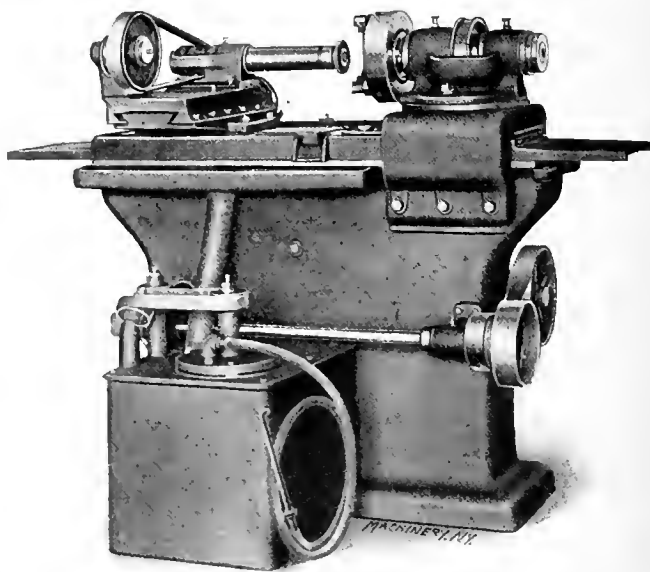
Rear View of Machine showing Drive of Wheel Spindle and Provision for Wet Grinding.
